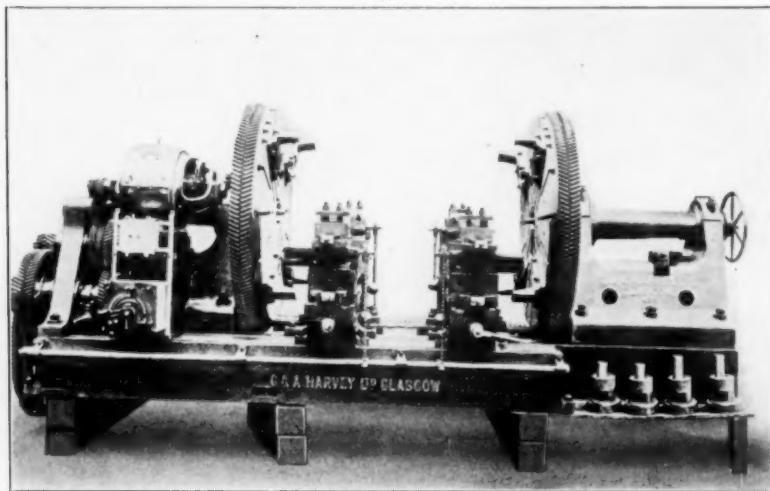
TIRE-TURNING LATHE WITH HERRINGBONE GEARS
